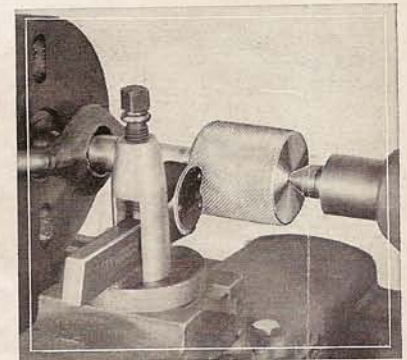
Knurling a Large Handle Between Centers in the No. 22—9-inch Junior Lathe
